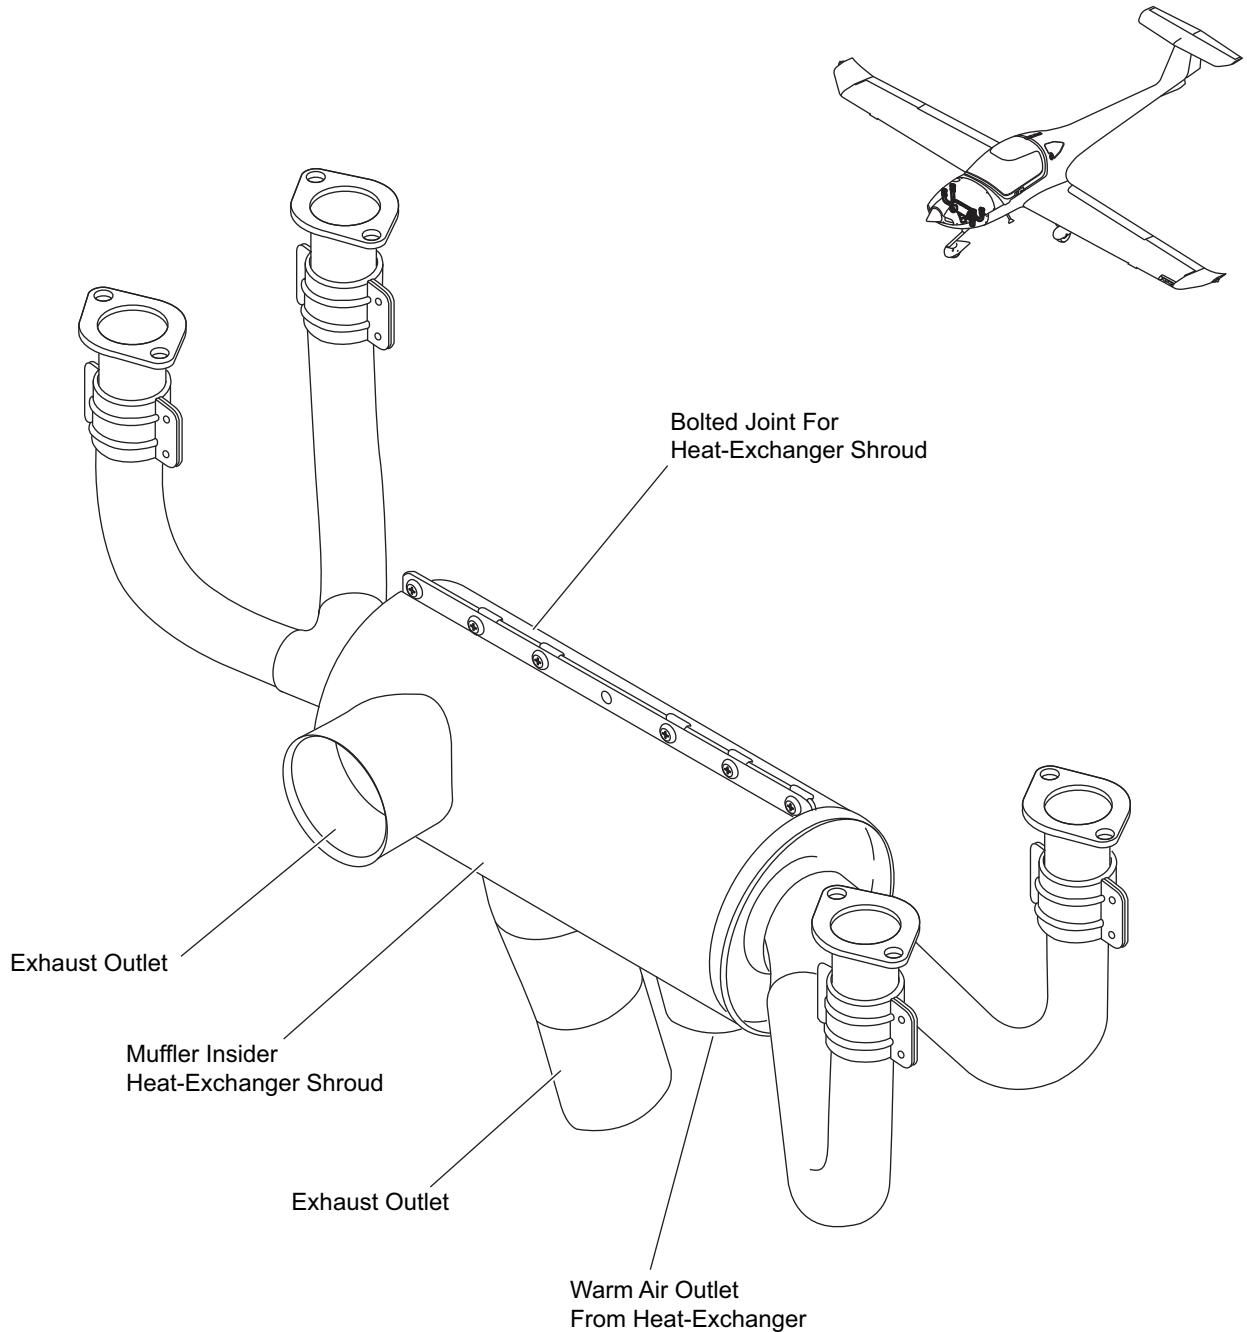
Heat Exchanger Installation on the Exhaust Muffler
